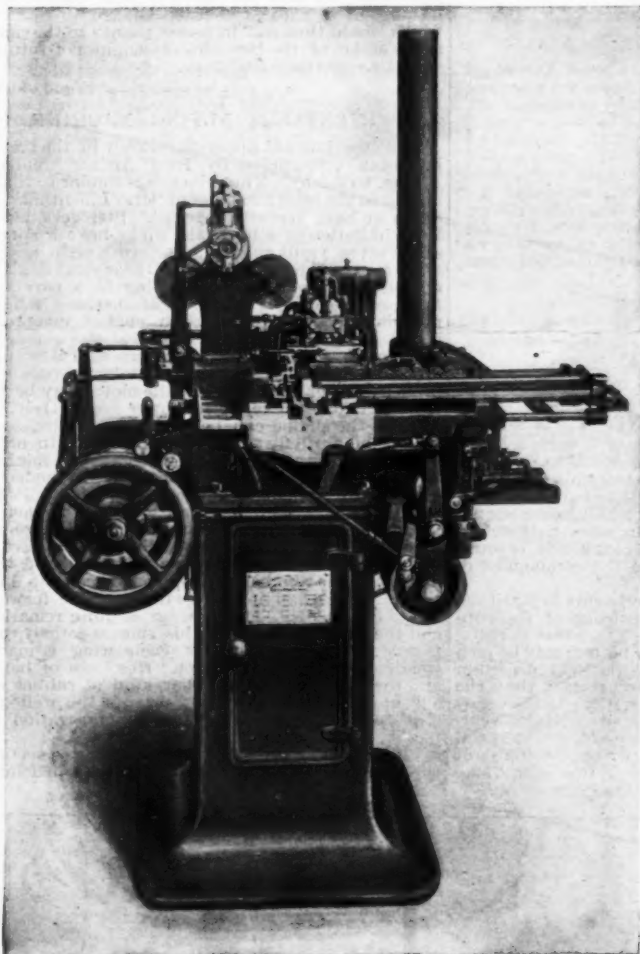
FRONT VIEW MONOTYPE CASTING MACHINE.
